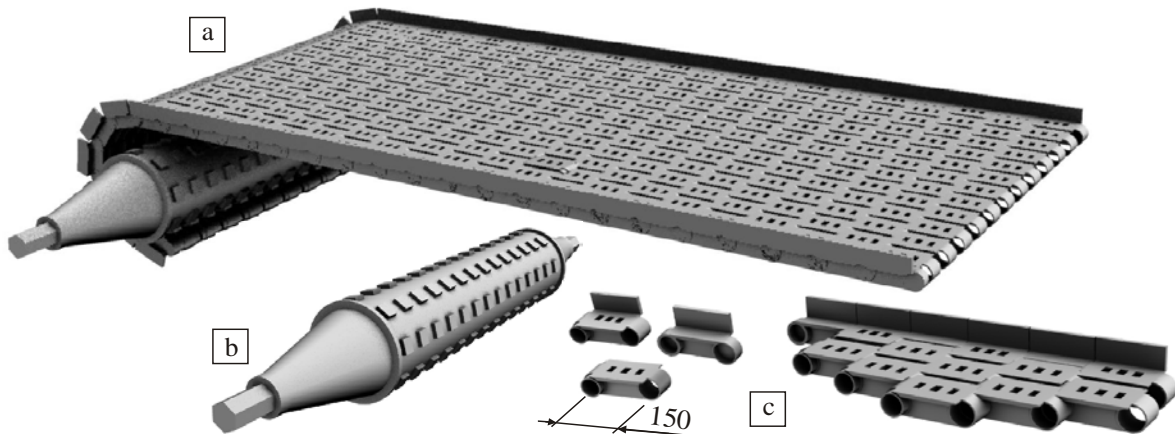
Belt conveyor composed of cast segments [5]; a schematic representation according to a folder published by COURTH Company - designations are explained in the text; material: GX40NiCrSi35-17 or GX40NiCrSiNb38-19
